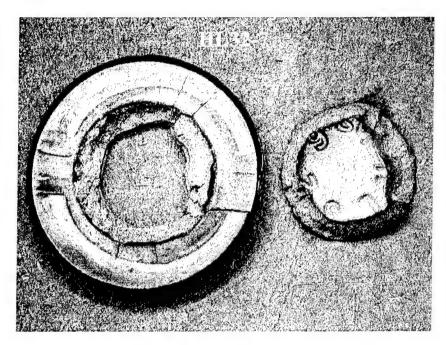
Increased Magnification of the Mating Fracture Surfaces of Fastener HL32-7's Head Failure.
